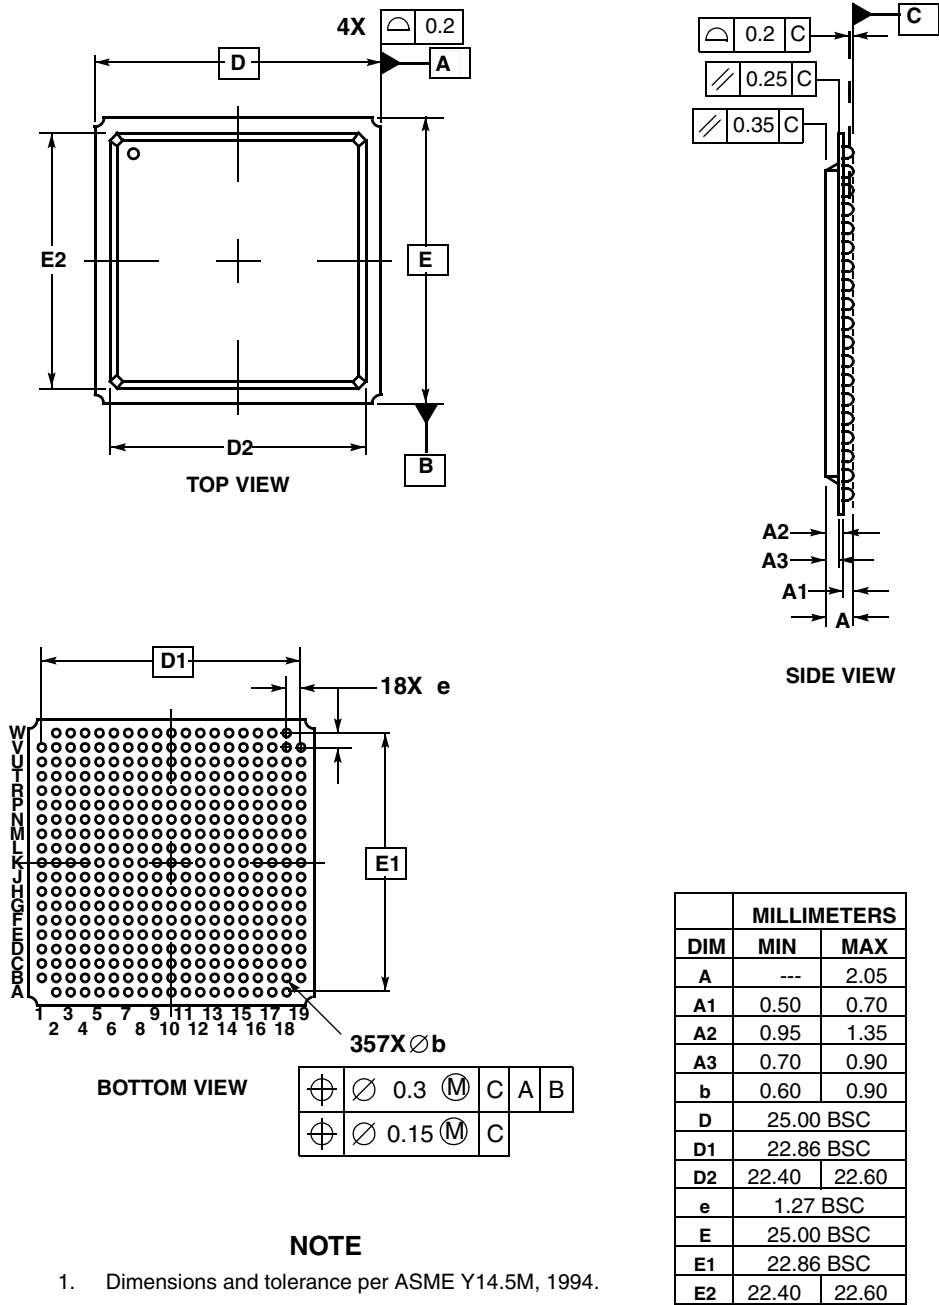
Mechanical Dimensions and Bottom Surface Nomenclature of the ZP PBGA Package
